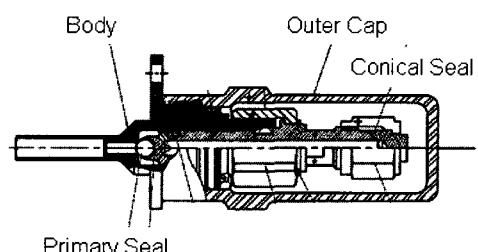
Fill/Drain Valve using Ball Type Primary Seal
